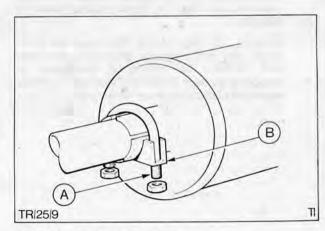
Typical 'U' bolt clamp joint A – 'U' bolt B – Clamp
